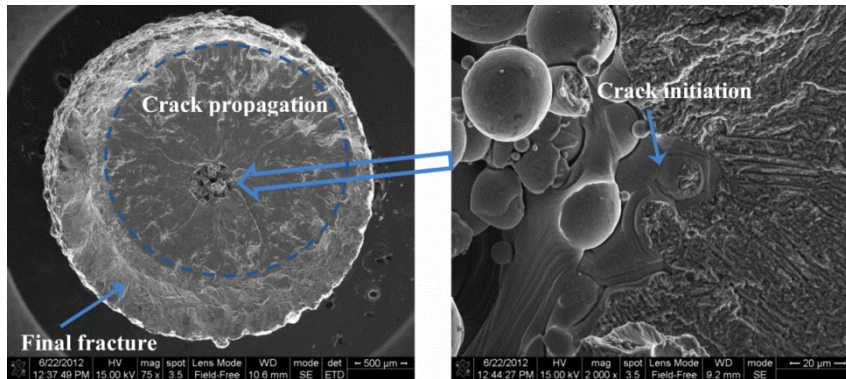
Fractography investigation of Ti-6Al-4V alloy fatigue specimen produced by LPBF: crack initiated from central double-conical defect [366].
